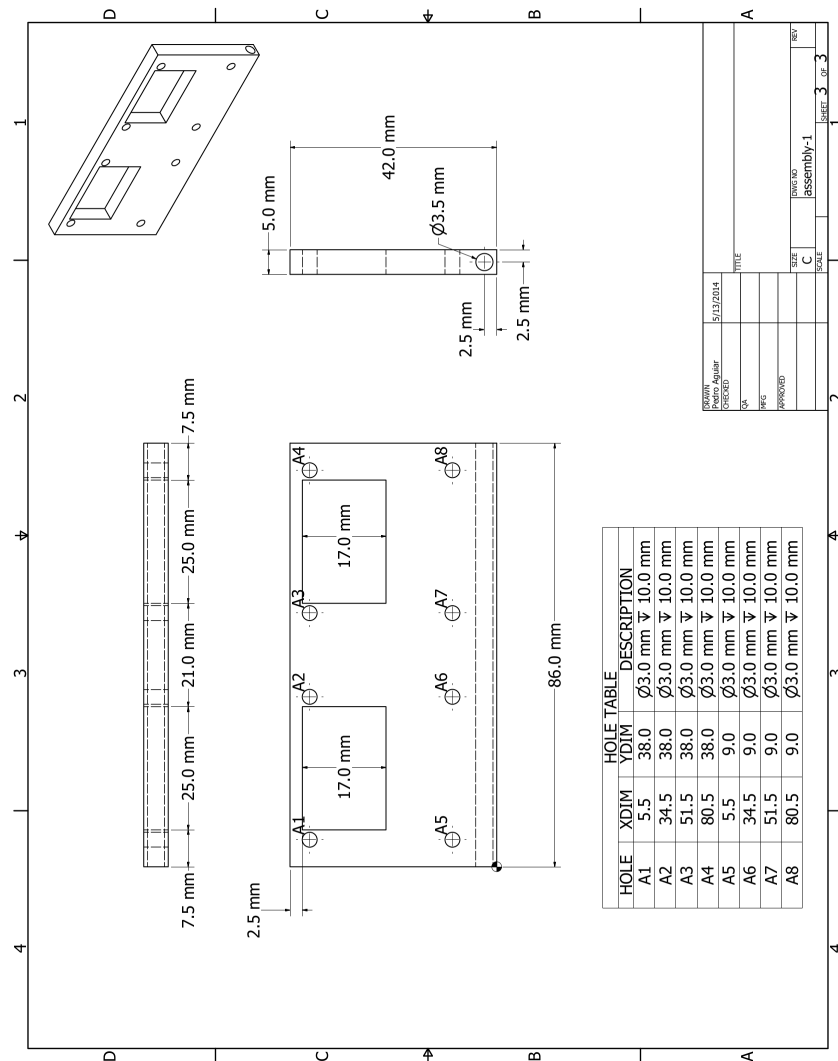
Camera mount mechanism drawings: Carrita's part.
